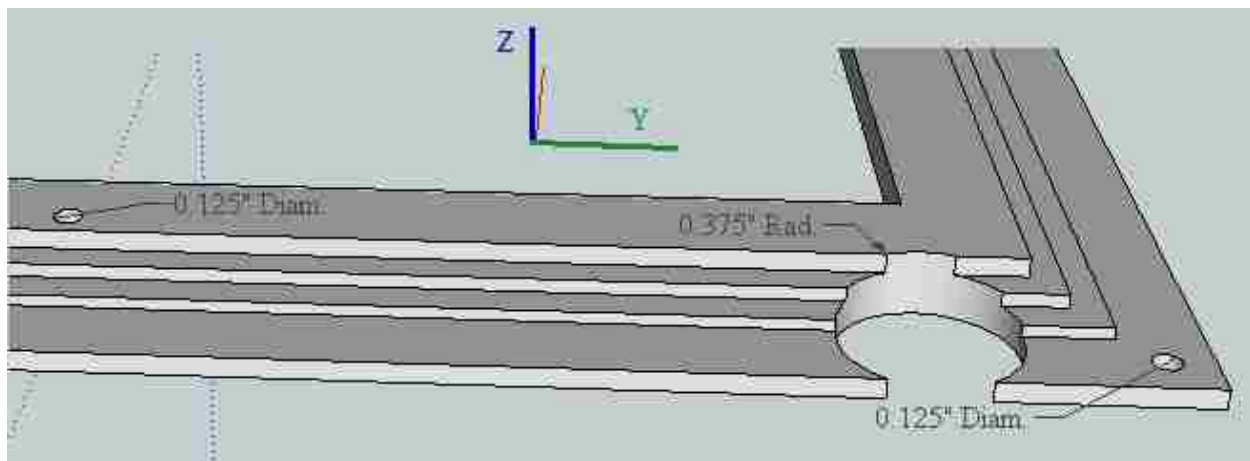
Orthogonal view of the 20x20 cm² middle trimmer lead plate illustrating hole dimensions.
